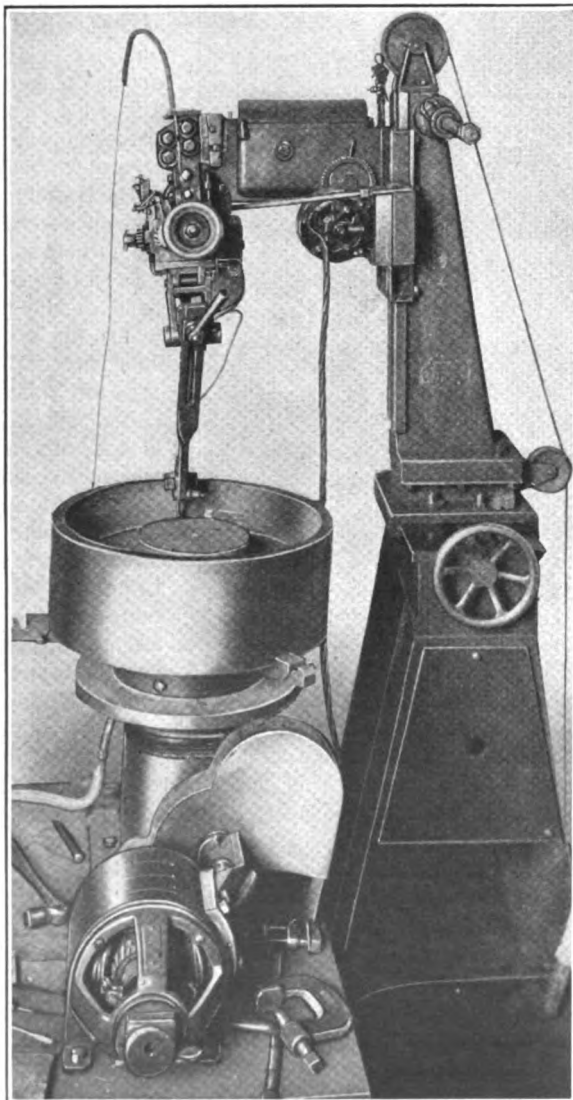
WELDING TOGETHER SOLENOID BRAKE WHEEL PARTS
